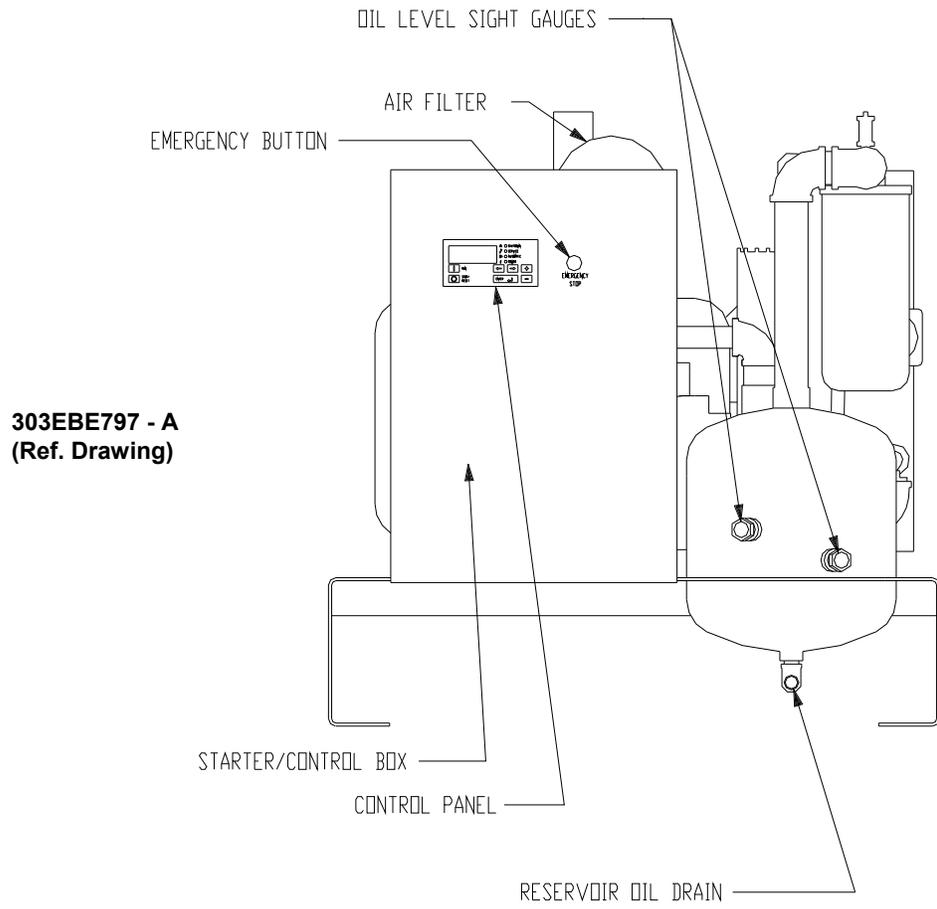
PACKAGE – OIL LEVEL GAUGES, STARTER/CONTROL BOX & AIR FILTER
